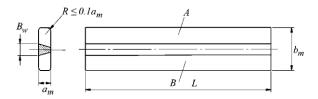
Plan of V-notch specimens cutting out
